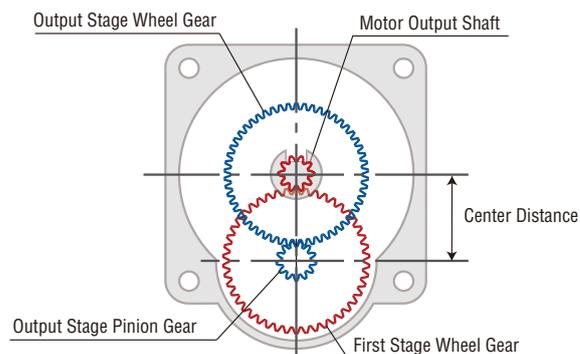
Concentric Structure of CS Gearbox (View from front side)
